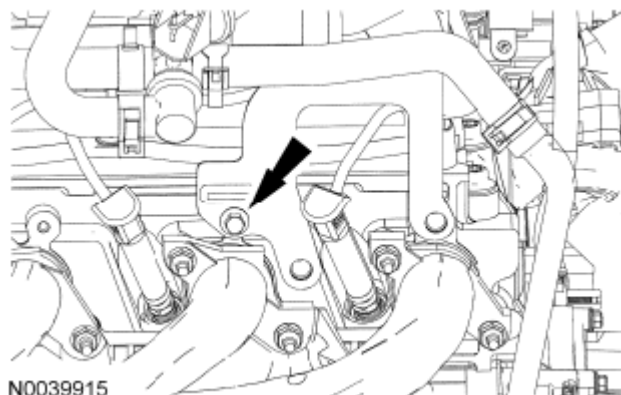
Locating Heater Hose Tube Bracket And Hoses Assembly With Bolt
